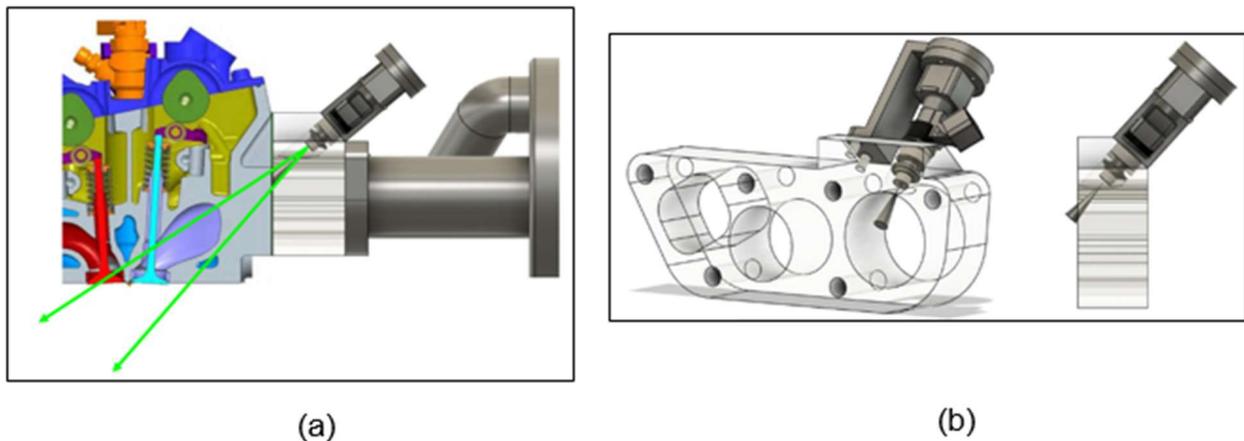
(a) Analysis of spray angle integrated into the cylinder head, (b) Adapter for installing the PFI injector close to the intake valves.
